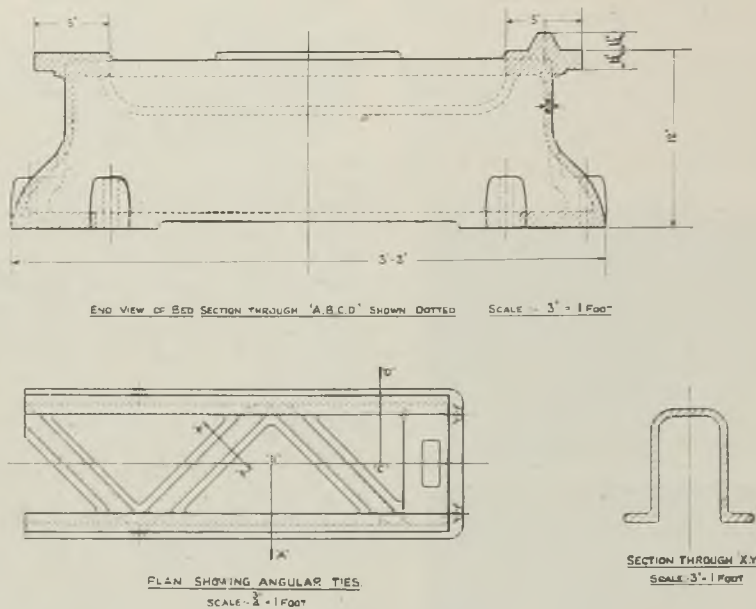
SECTION OF MACHINE-TOOL BED.
